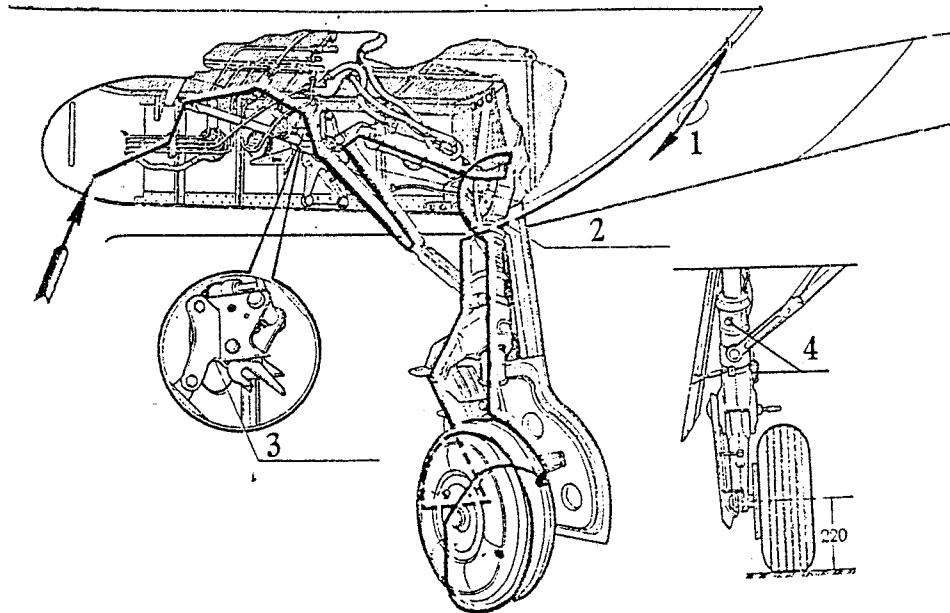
Inspection Circuit for Right Landing Gear and Right Landing Gear Bay
